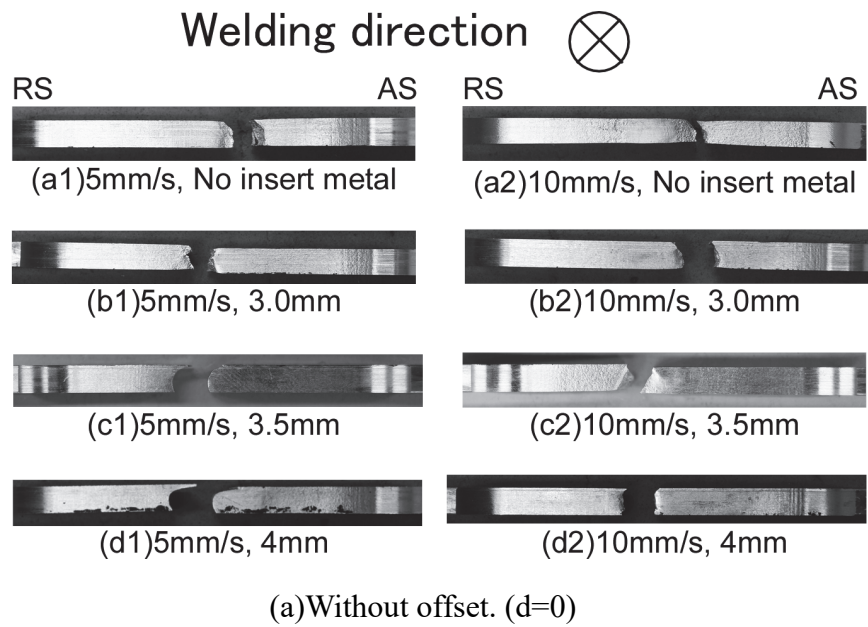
Macrostructure of a fractured tensile testpiece.
